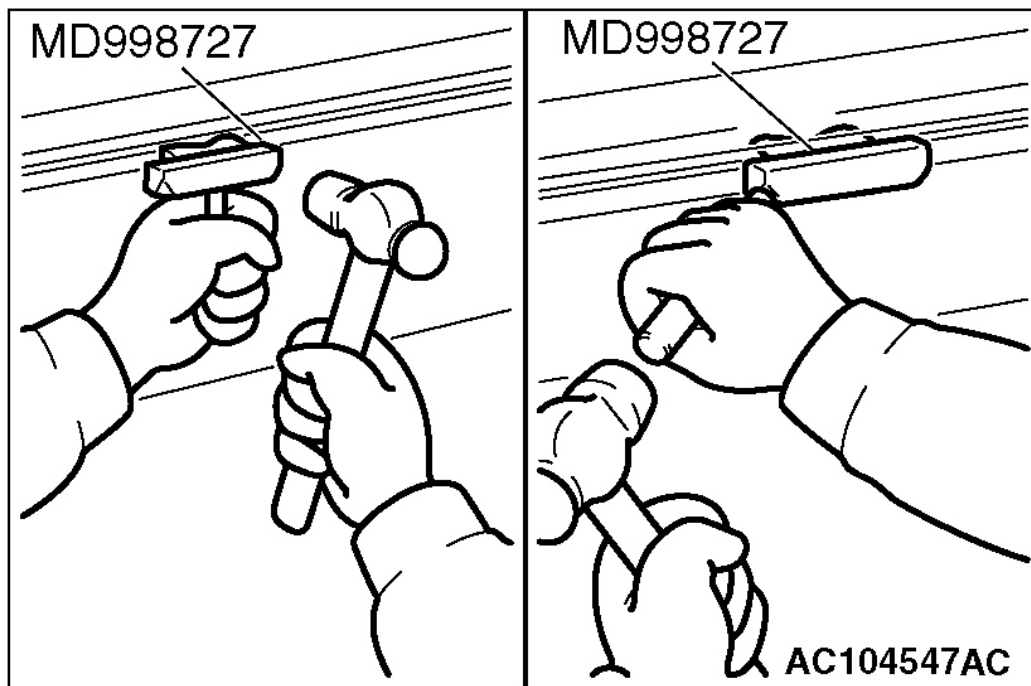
Removing Engine Oil Pan Using Taping Tool MD998727
